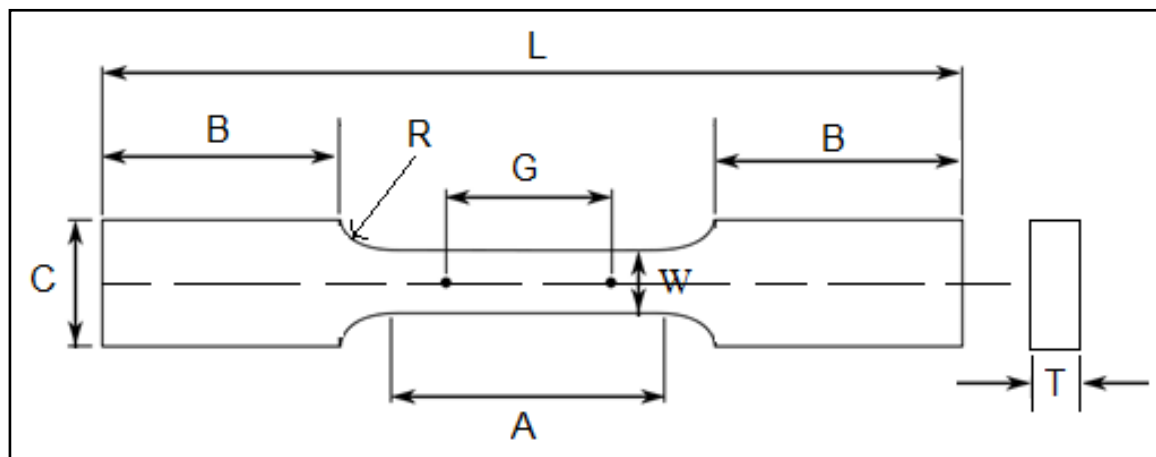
Examples of rectangular (flat) tensile test specimen
